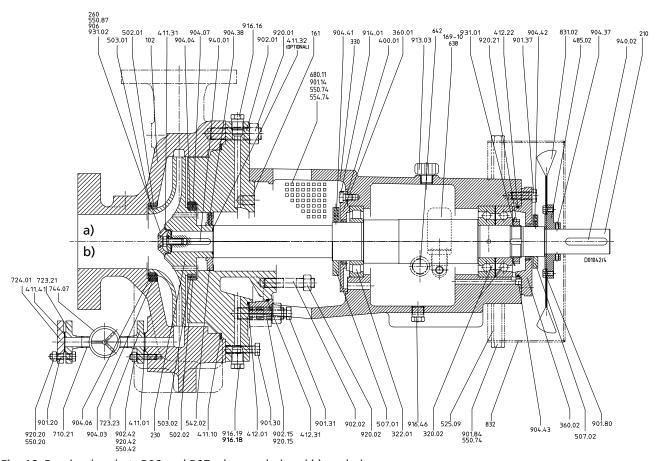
Bearing brackets B06 and B07, a) uncooled and b) cooled
